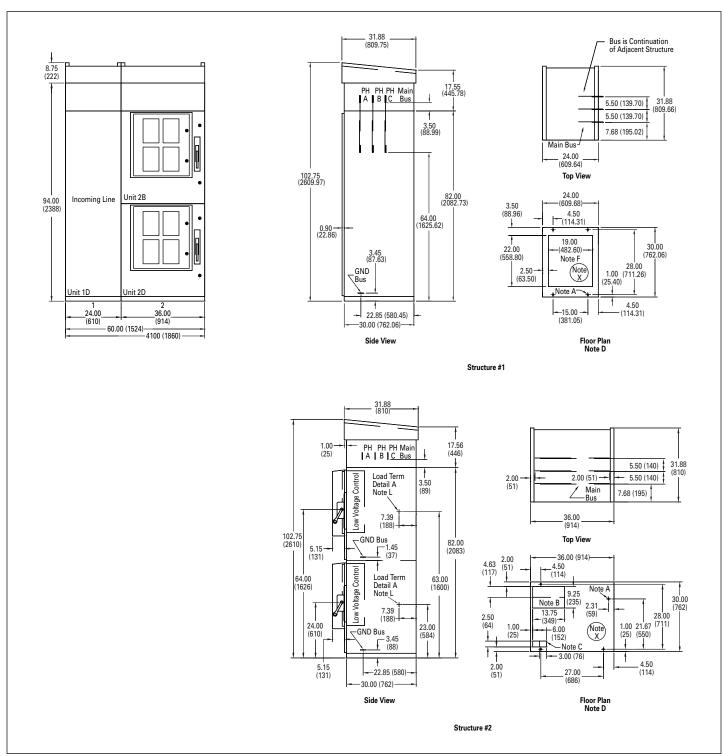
Arrangement Detail (Full Voltage 400 A) NEMA 3R
